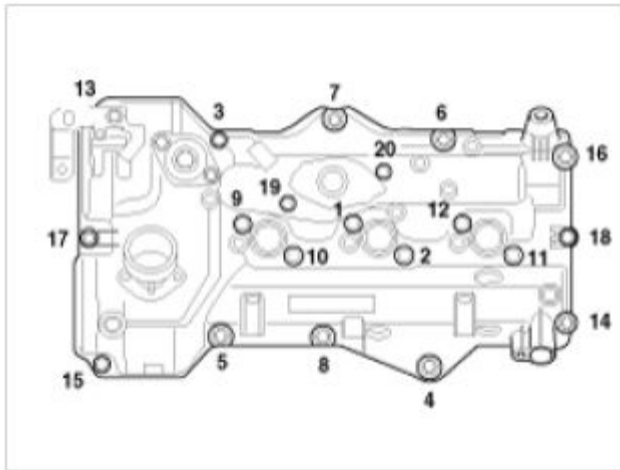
Identifying LH Cylinder Head Cover Mounting Bolts Tightening Sequence
